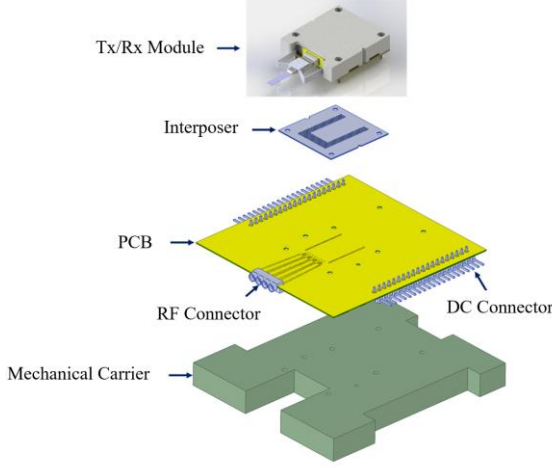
Assembly of an RFoF OSA. The Tx/Rx modules are mounted on a PCB via an interposer. Mechanical stability is provided by the mechanical carrier.
